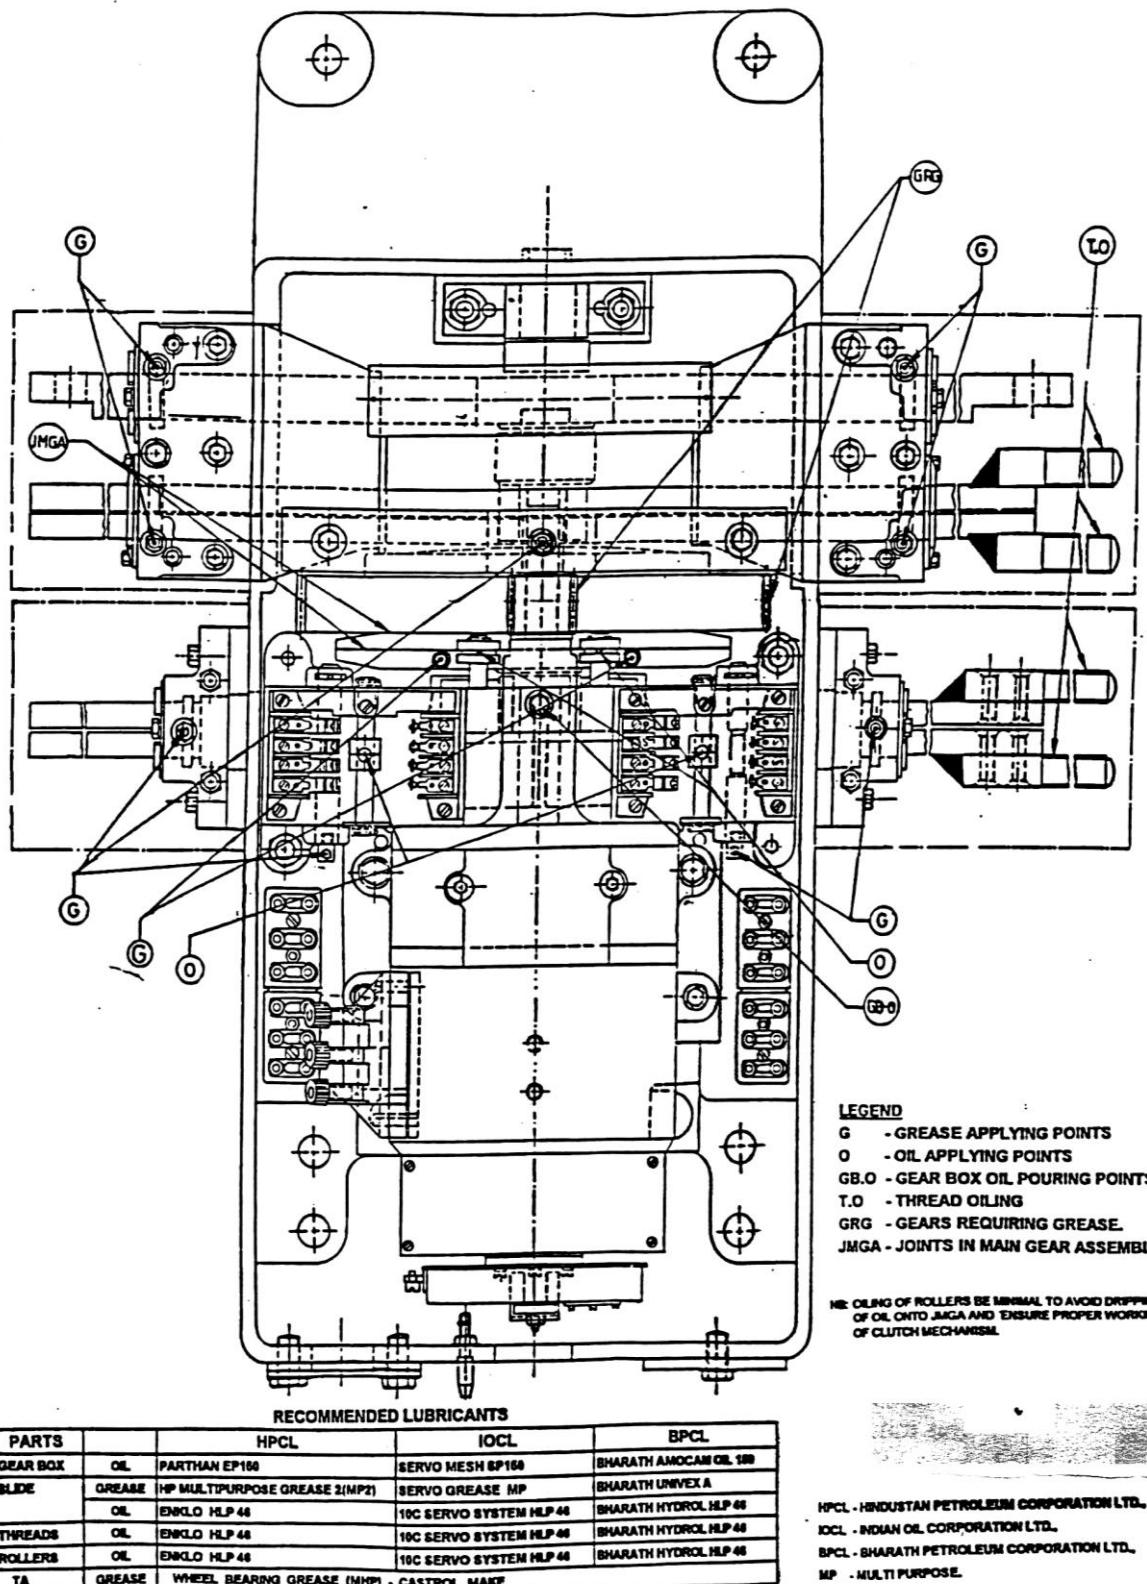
IRS POINT MACHINE LUBRICATION DIAGRAM
